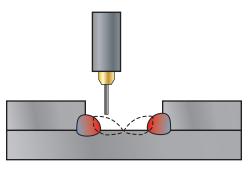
Start the plug weld around the bottom edge of the hole.
